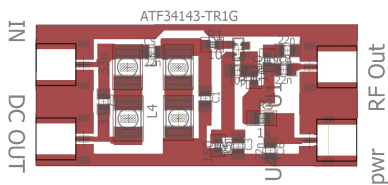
Layout of the PCB that was designed to hold our double tank circuit. For dimensions of the components, see table below.
